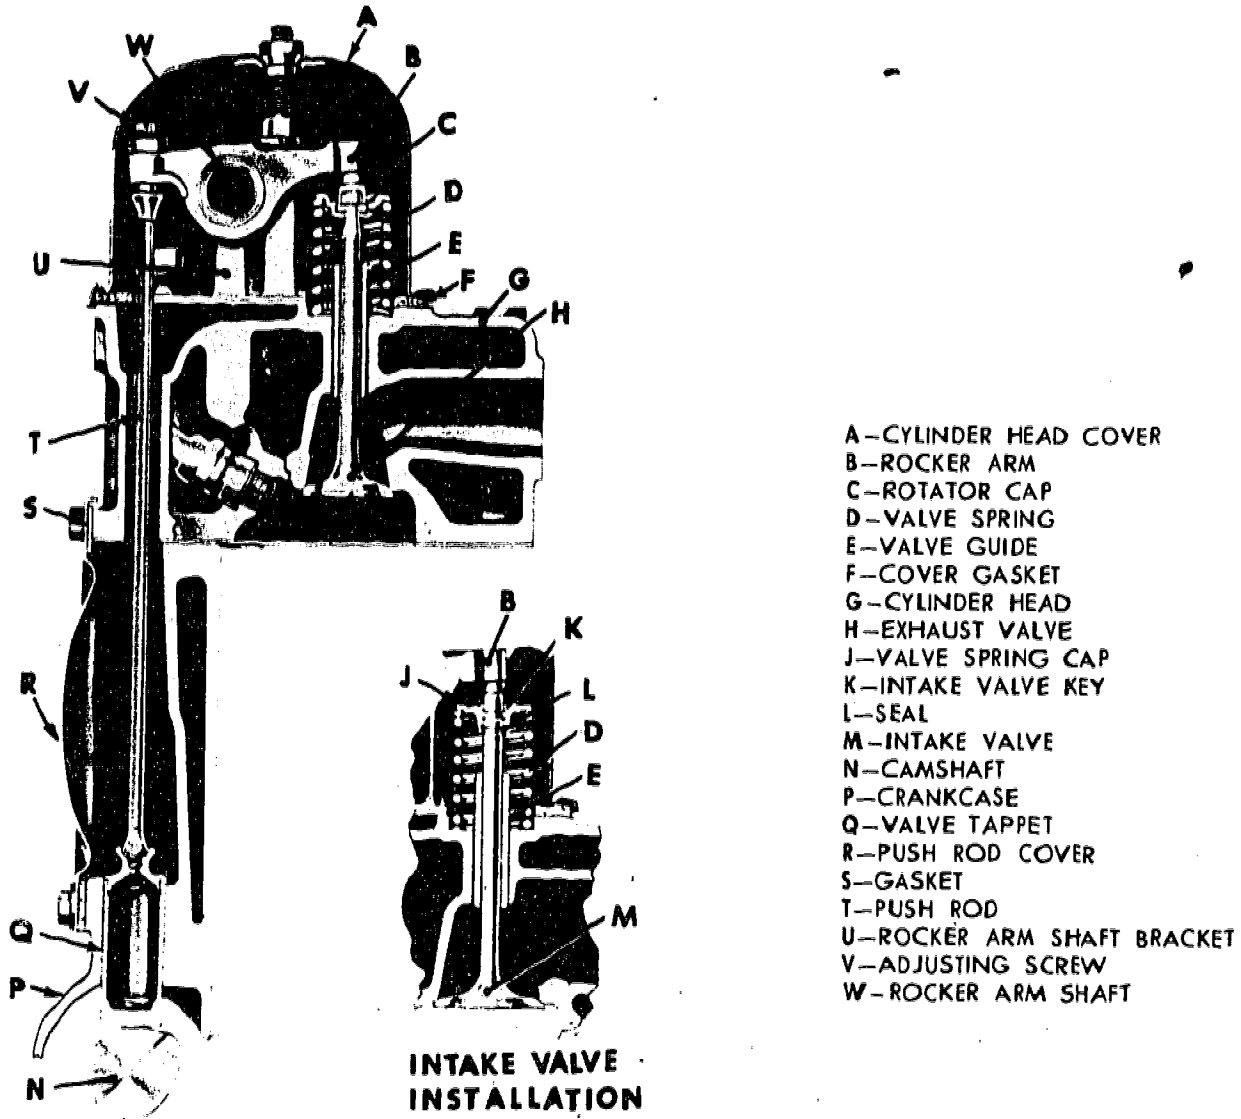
Valve operating mechanism for an overhead valve engine.
